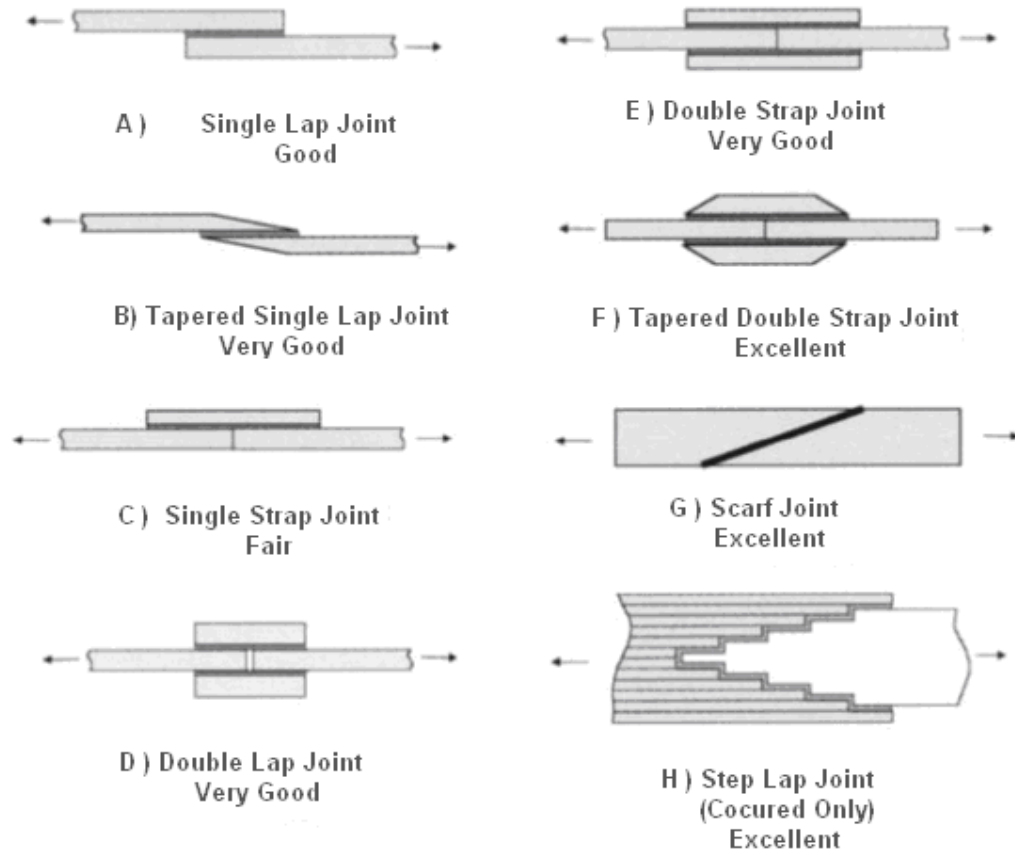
Typical adhesively bonded joint configurations (Campbell, 2011)
